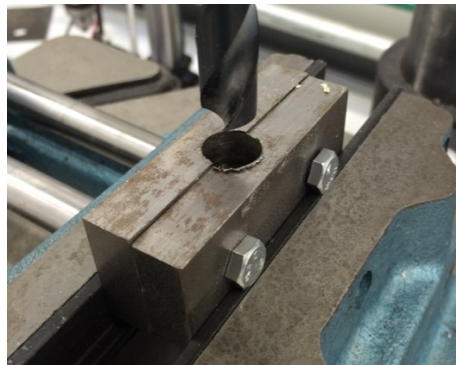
Prototype Slider Mount during Through-Hole Drilling
